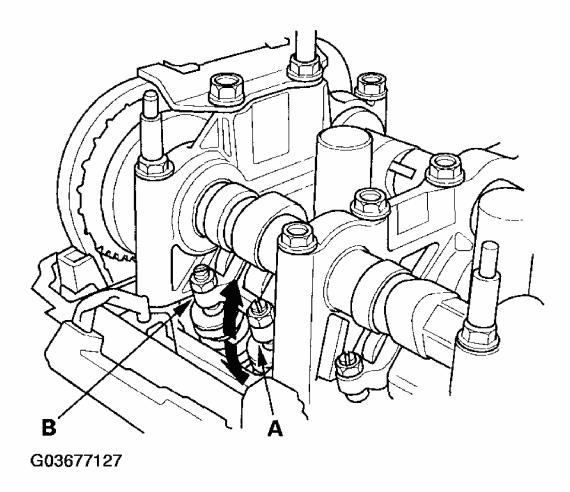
Identifying Intake Primary And Secondary Rocker Arm And Movement Courtesy of AMERICAN HONDA MOTOR CO., INC.
